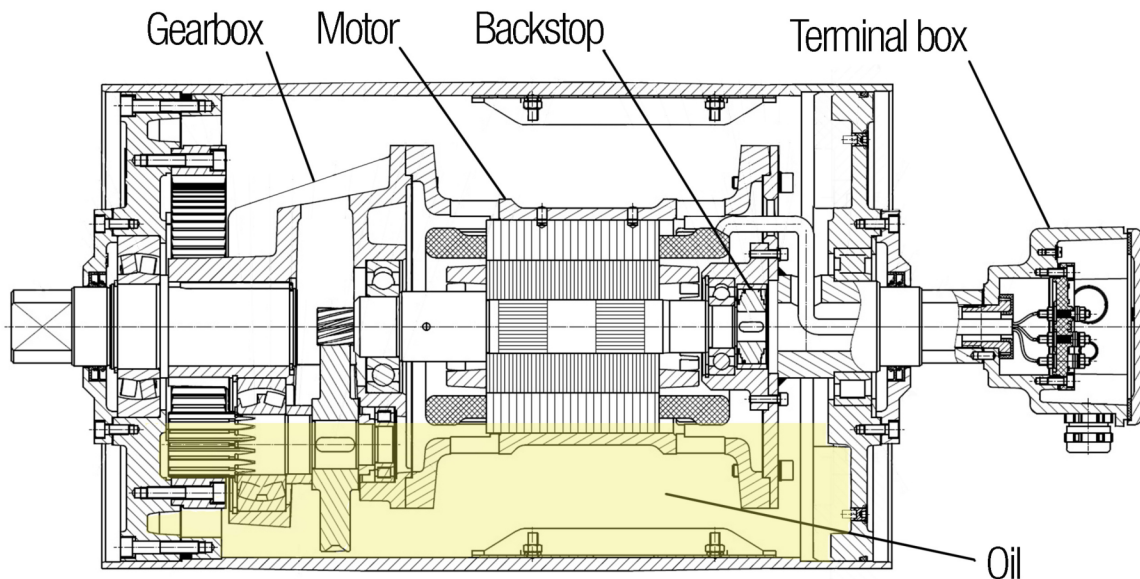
Cross-section shows typical oil fill level, oil plugs, drip lips, drivetrain, and all bearings enclosed within hermetically sealed pulley shell.
